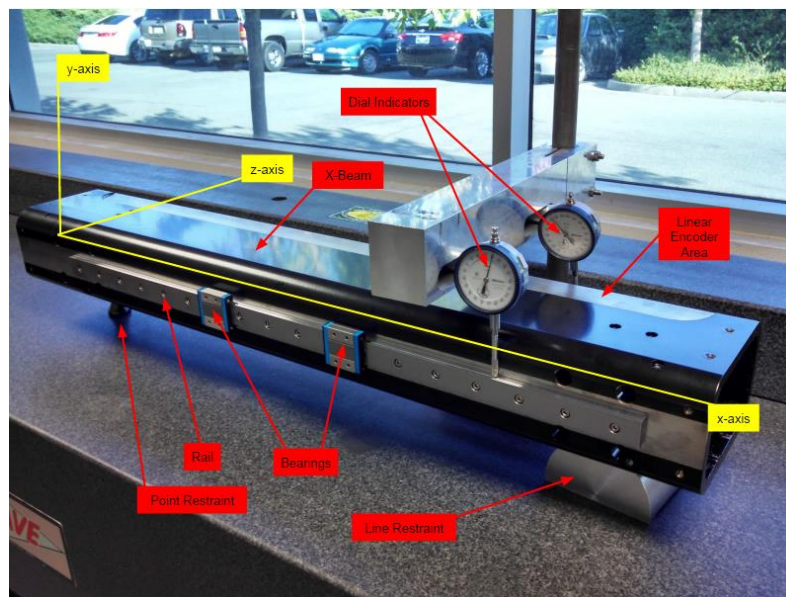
Assembled X-Beam with labels. The X-Beam with rails and bearings affixed in its three-dimensional constrained setting used by Micro-Vu during assembly.
